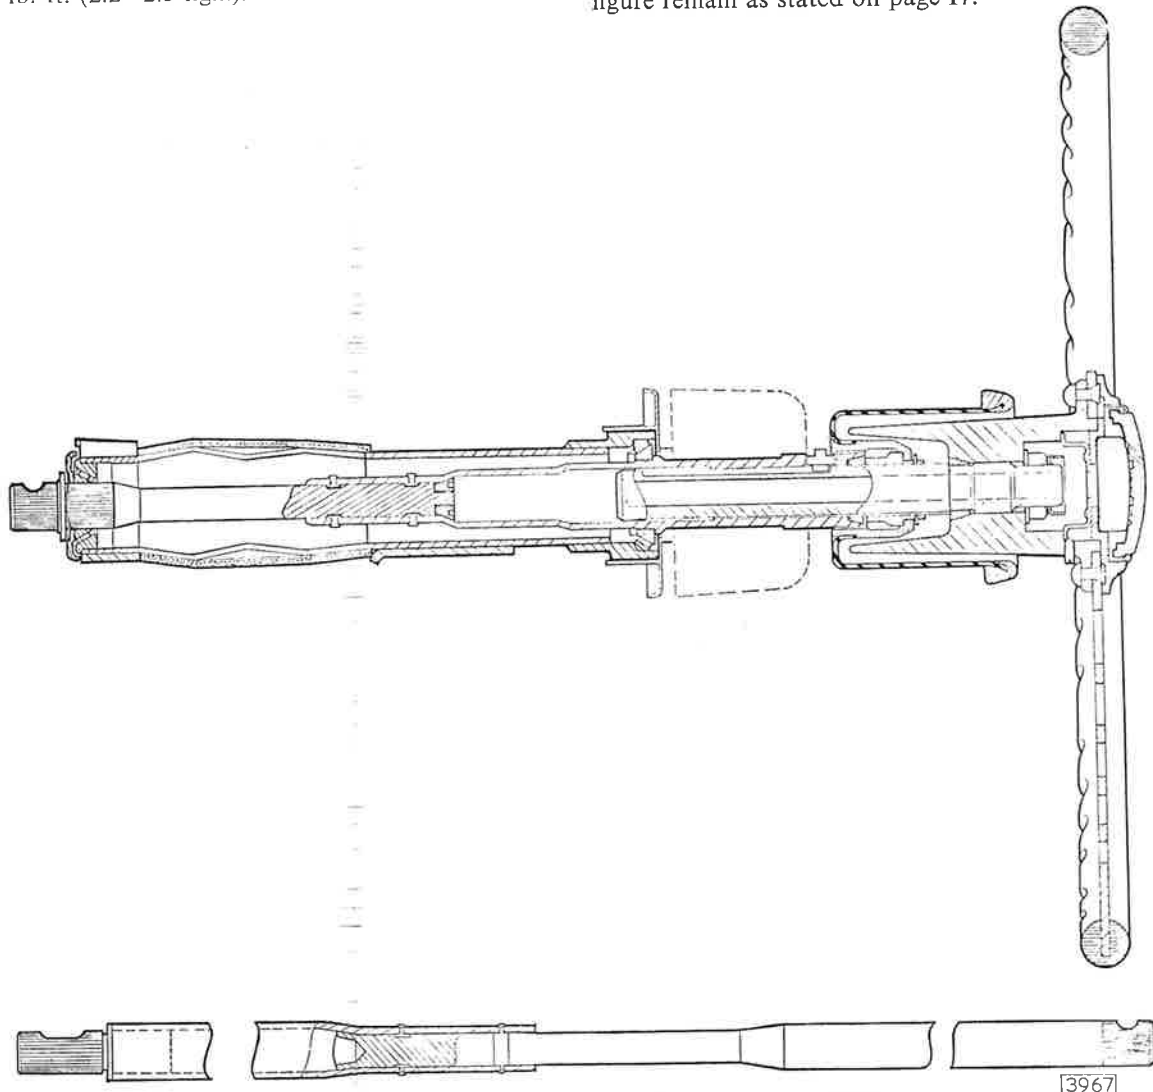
Sectioned view of the upper and lower steering columns showing the nylon plugs.
